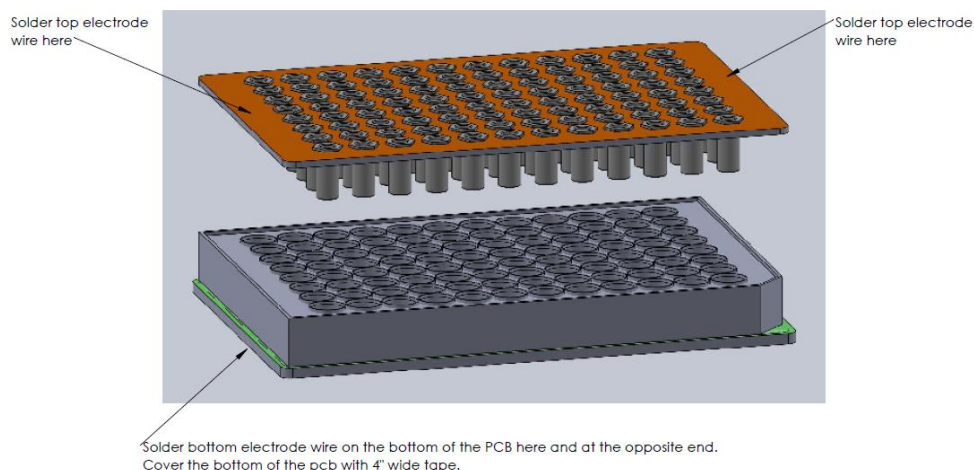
Complete E-DBS device assembly by parts, showing top and bottom electrodes.
